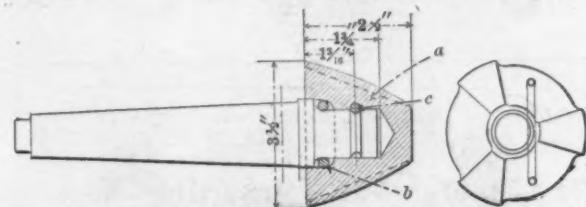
Detail of the Special Tail Center Used When Turning Hollow Billets.
